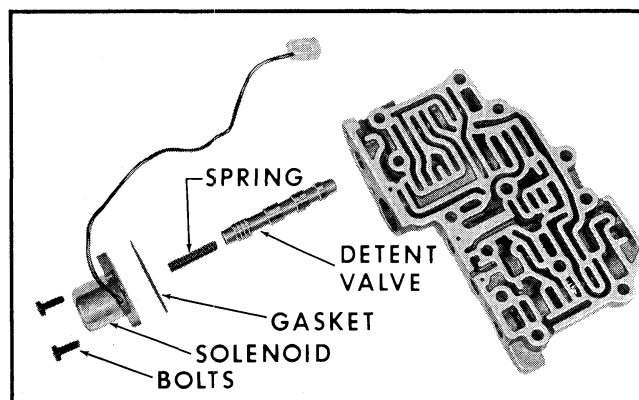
B-48 Downshift Solenoid and Detent Valve - Exploded View
